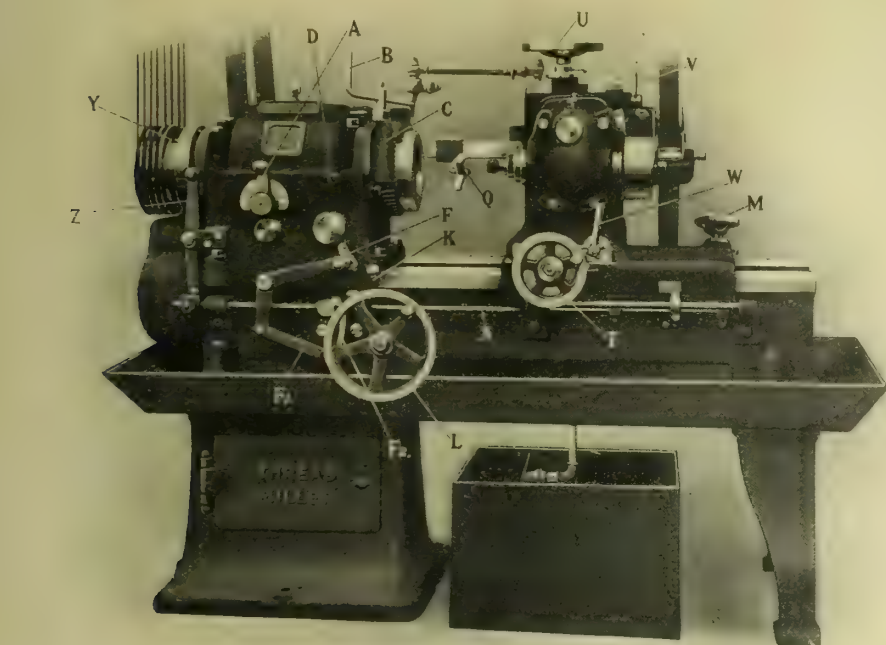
THREAD MILLING MACHINE. MESSRS. PARRINSON & SON, SHIPLEY.
